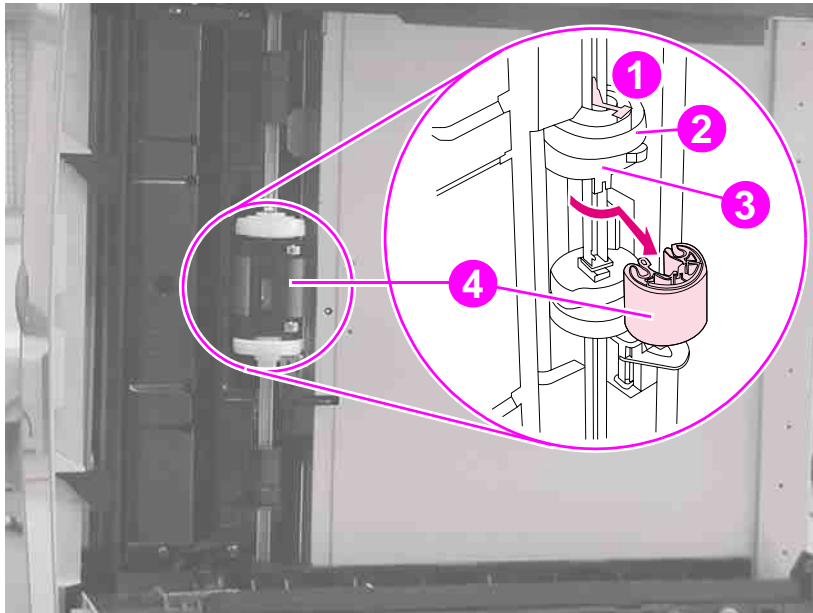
Tray 2 pickup roller removal (bottom of the printer)
